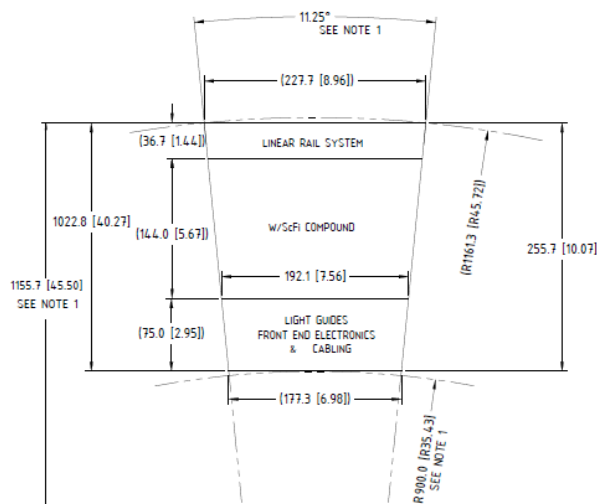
Cross sectional drawing of an EMCAL sector.
